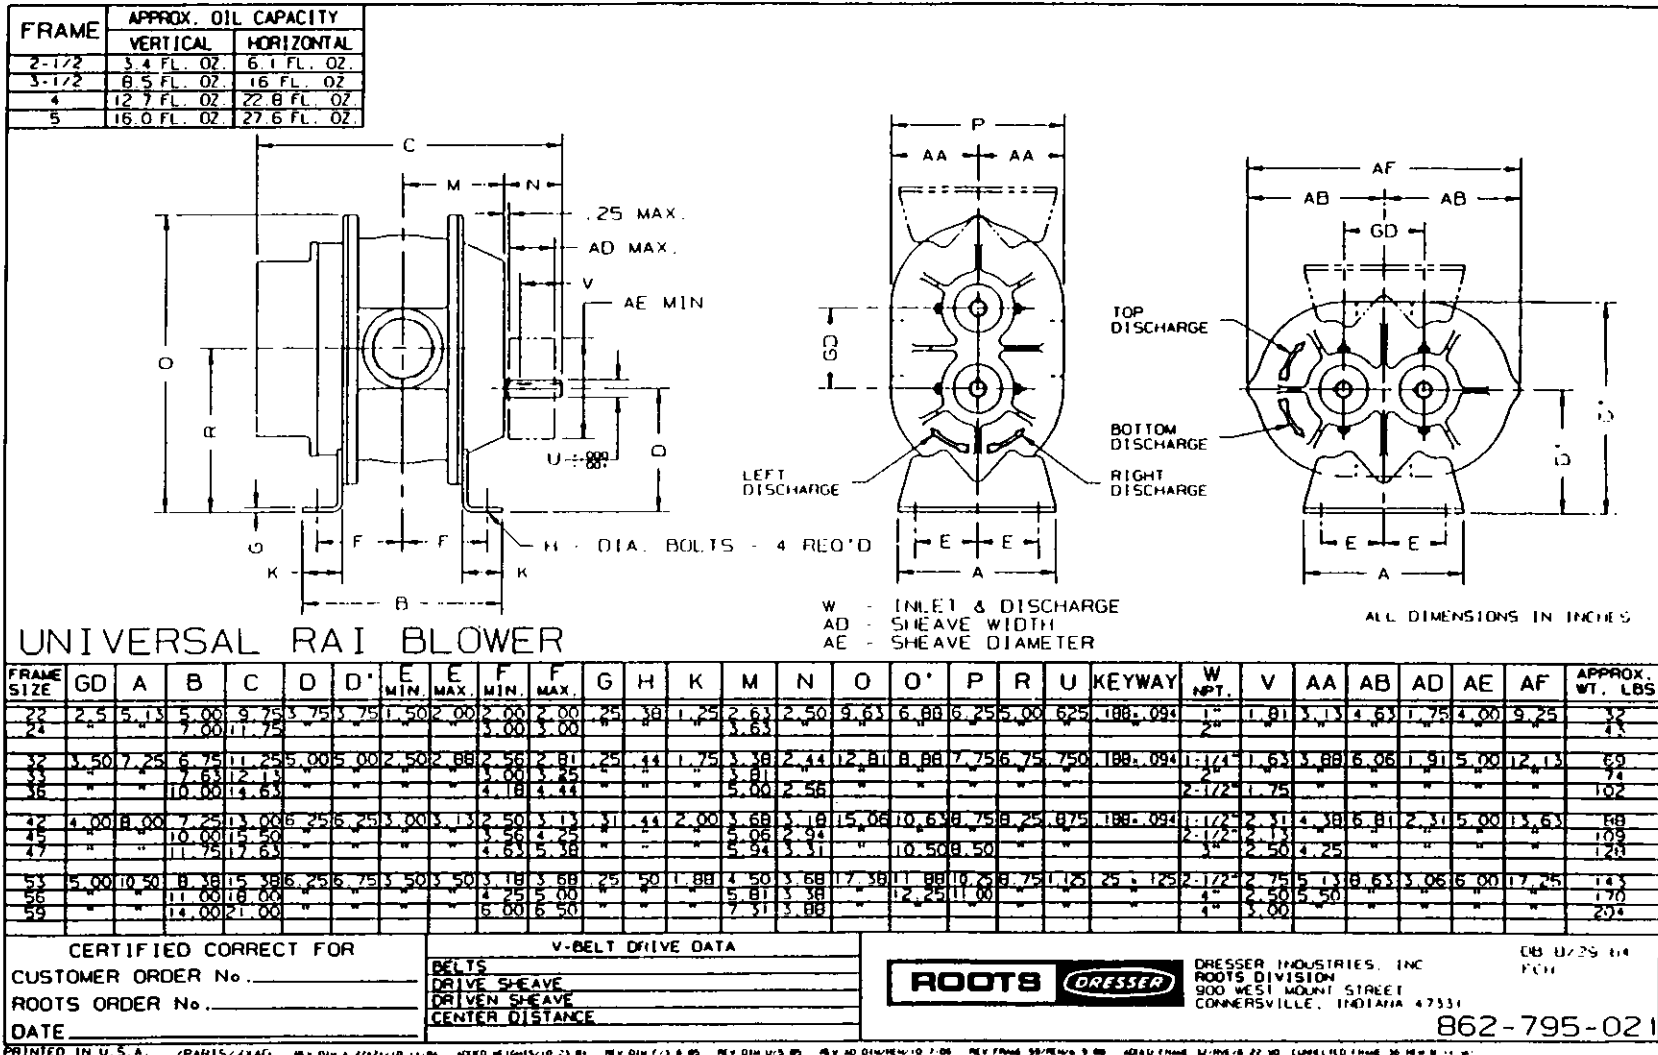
Dimensional Assembly of UNIVERSAL RAI® Blower (2 1/2"-5")
